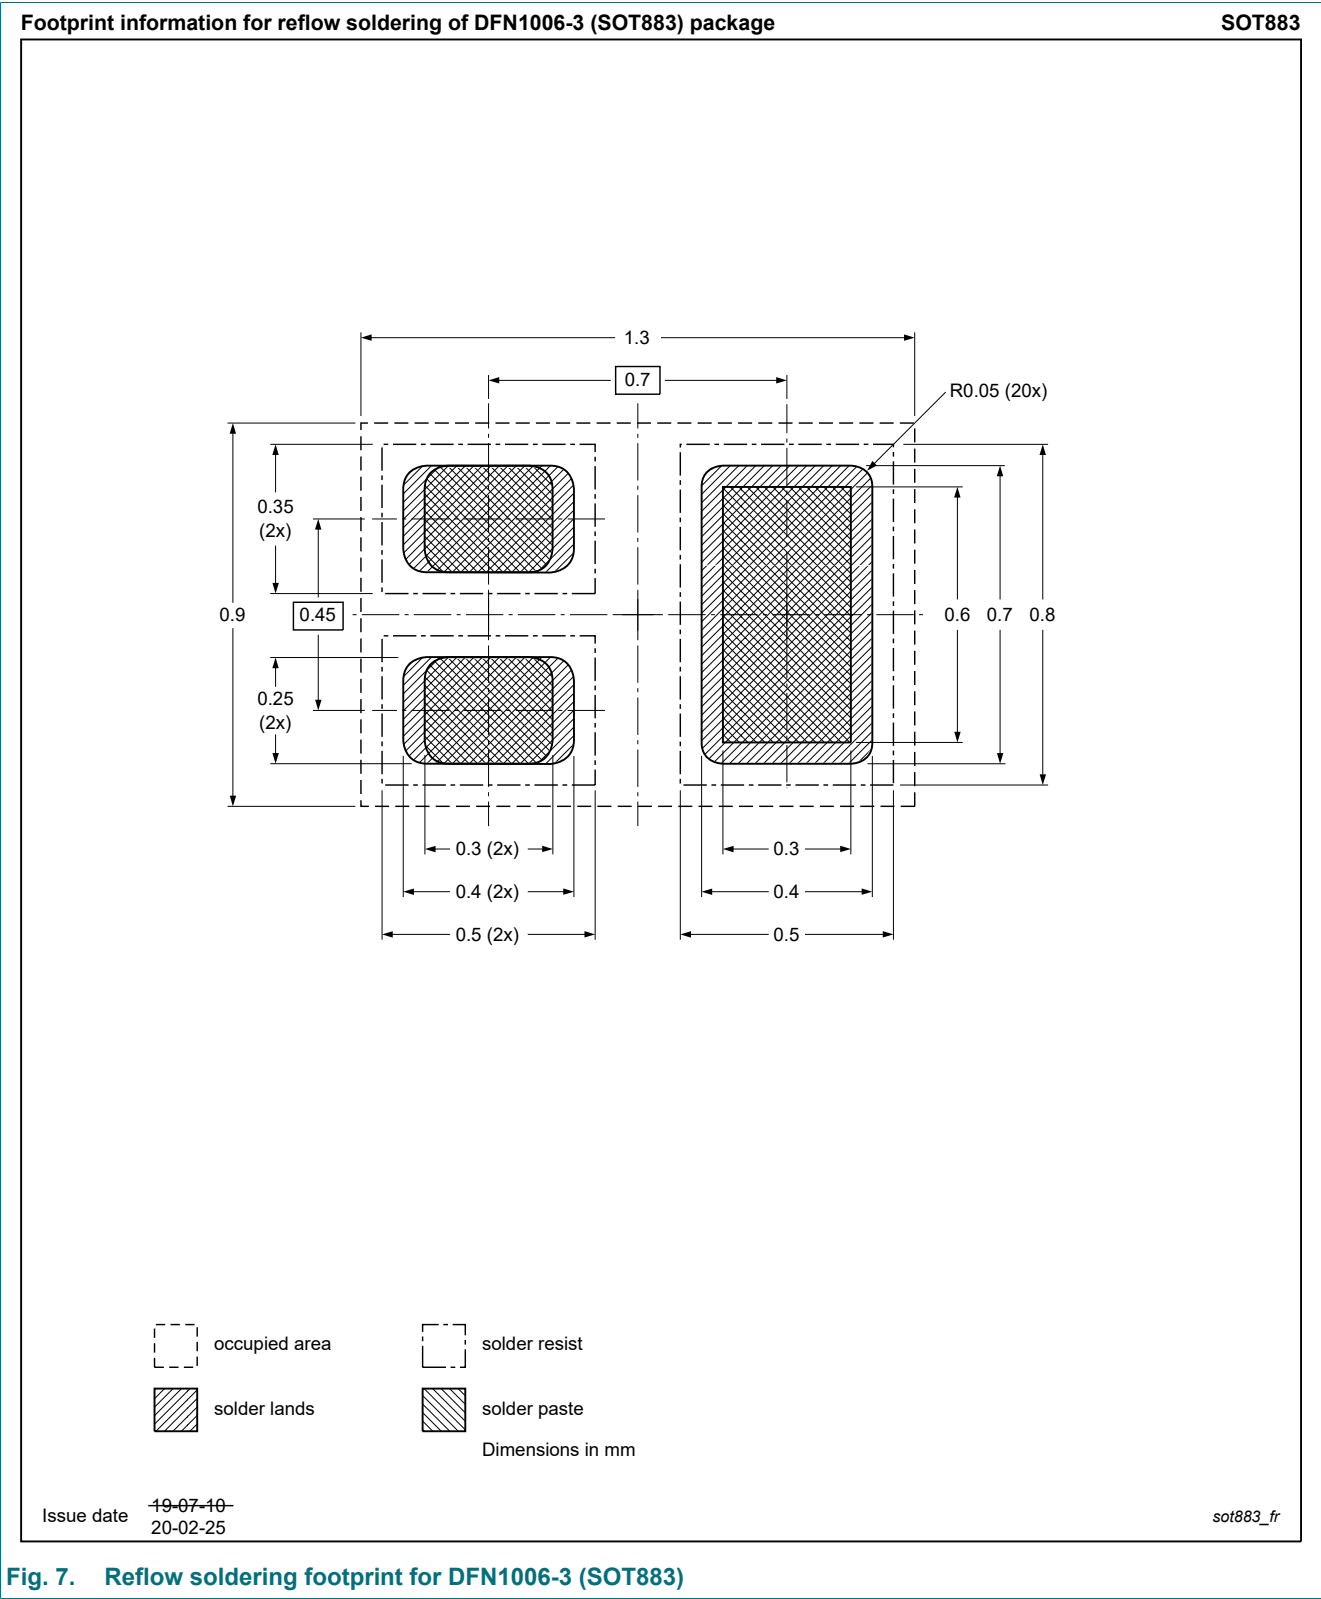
Reflow soldering footprint for DFN1006-3 (SOT883)
